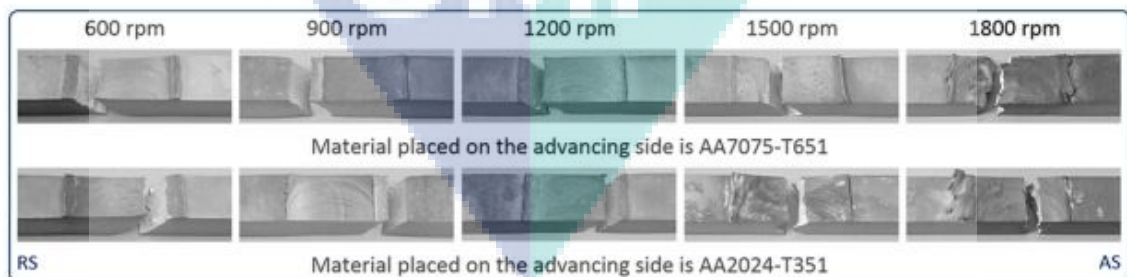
Fracture locations of the tensile test specimens at different tool rotation rates. AS advancing side, RS retreating side
